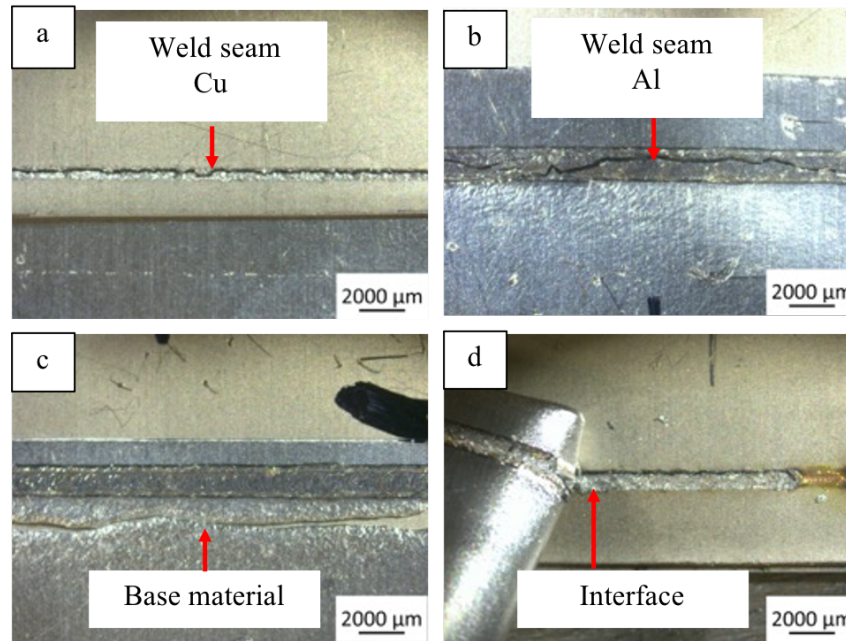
Example of failure mode for Al-Cu-Busbar: failure at the weld seam near the Cu tab(a), failure at the weld seam(b), failure at the base material (c) and failure at the interface (d).
